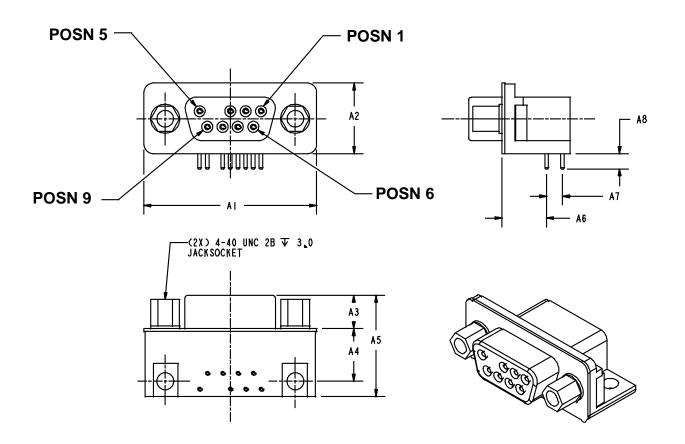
Fixed board right angle through hole (version 1) overview and outline dimensions
